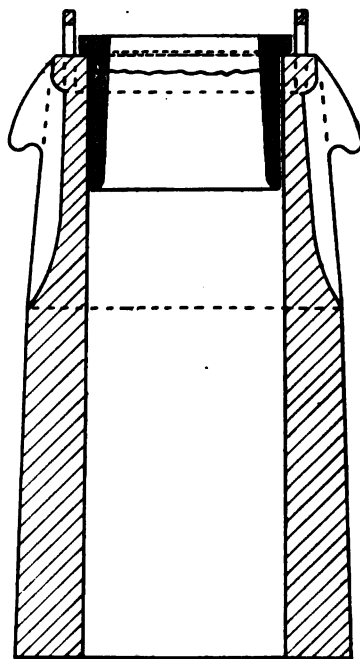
SINK-HEAD APPLIED TO GATHMANN INGOT MOLD.
